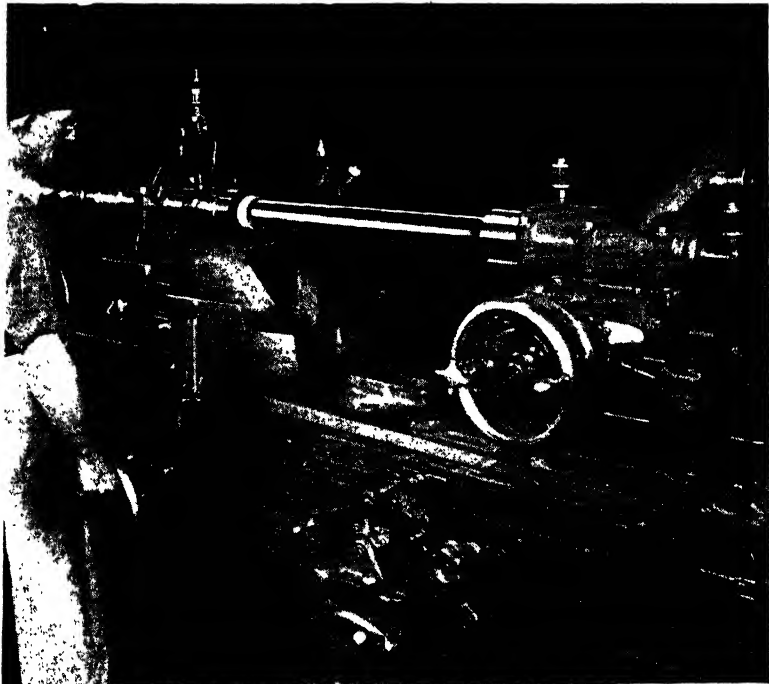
Grinding the Bore of a Cylinder for Aircraft Landing Gears
